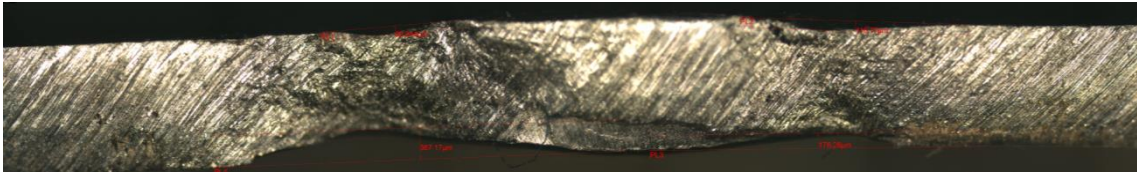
Necking at weld on either side of the weld seam in transition zone to HAZ – 1.7mm simple profile 2-1
